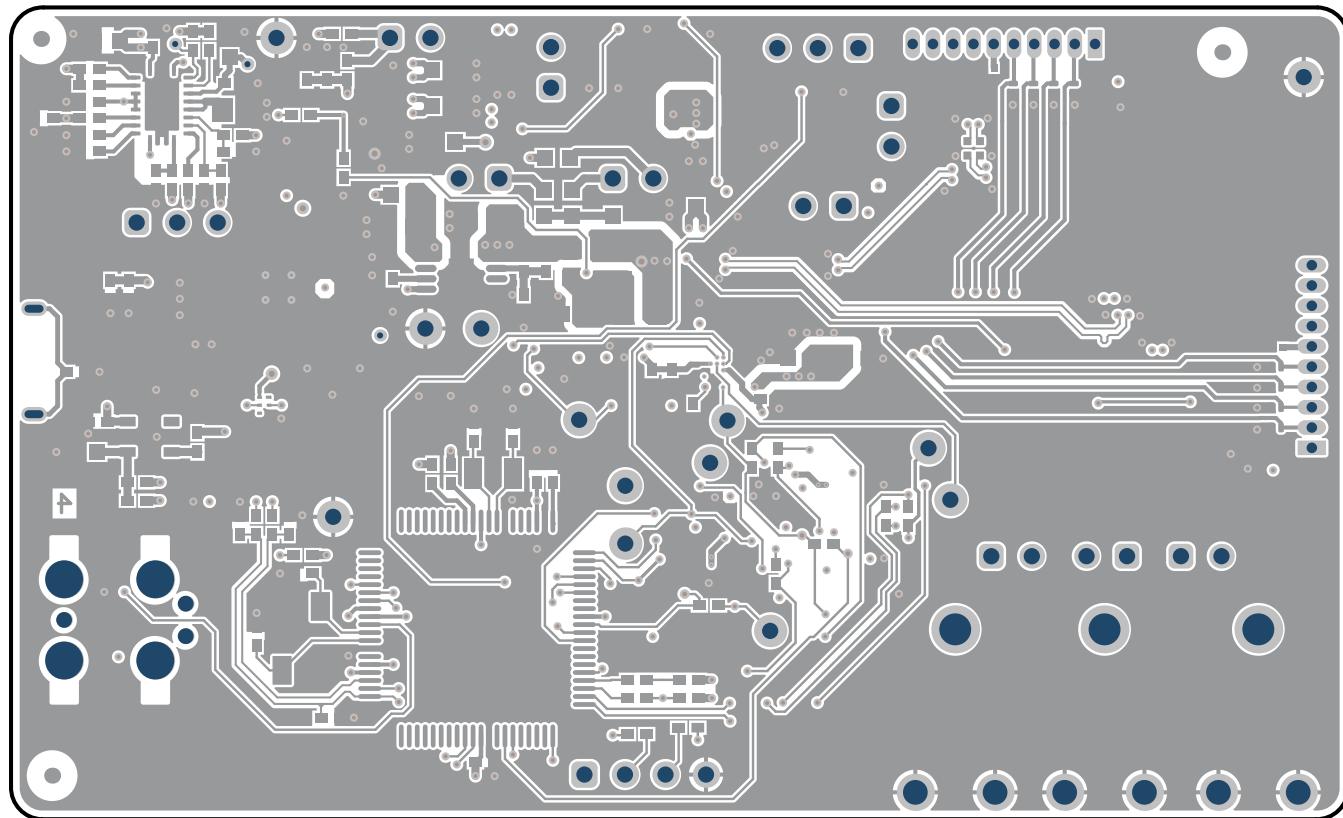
AFE4950EVM PCB Layout - Bottom Layer (1 of 6)
